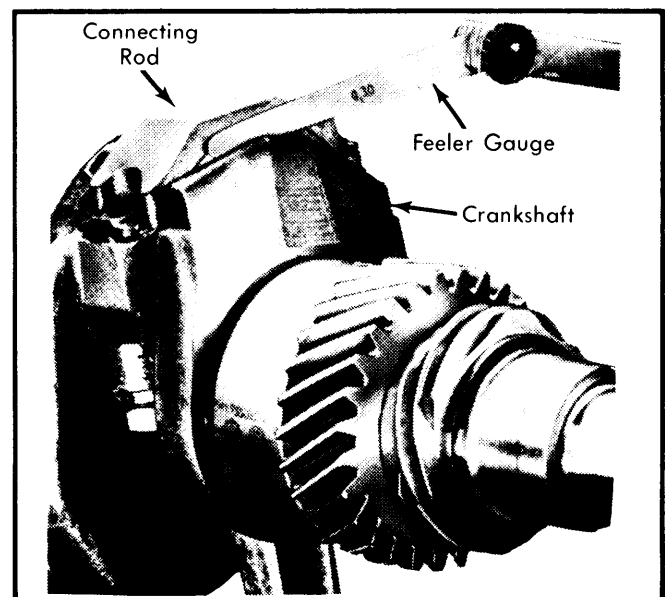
Using a Feeler Gauge to Check Connecting Rod Side Clearance
